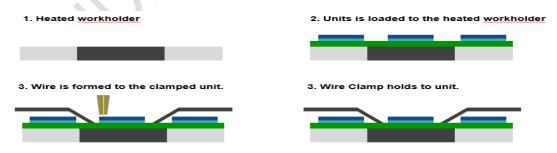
Mechanical sequence of wirebond equipment machine in forming a wiring connection to the silicon die and frames
